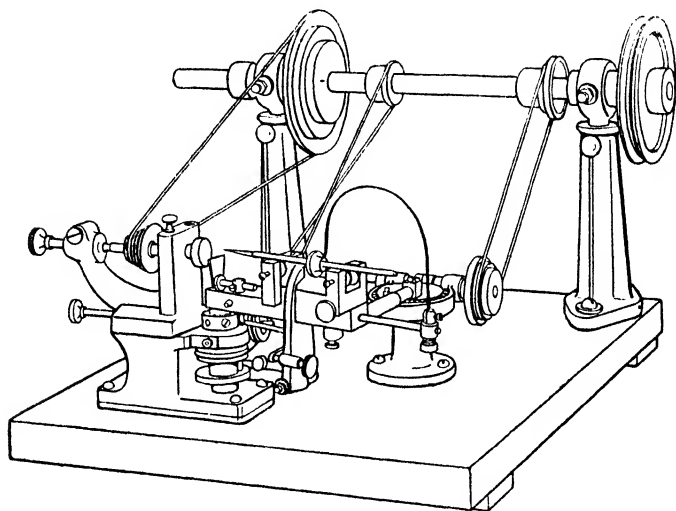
Single-spindle polishing machine with rotating die; similar machines are also equipped with rotating needle holders
